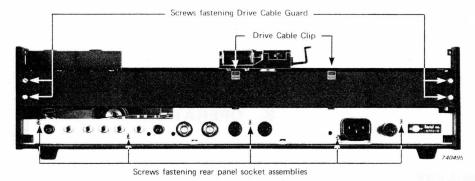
The 2308 with rear and bottom panels removed for mounting the rear panel sockets on the bottom panel
